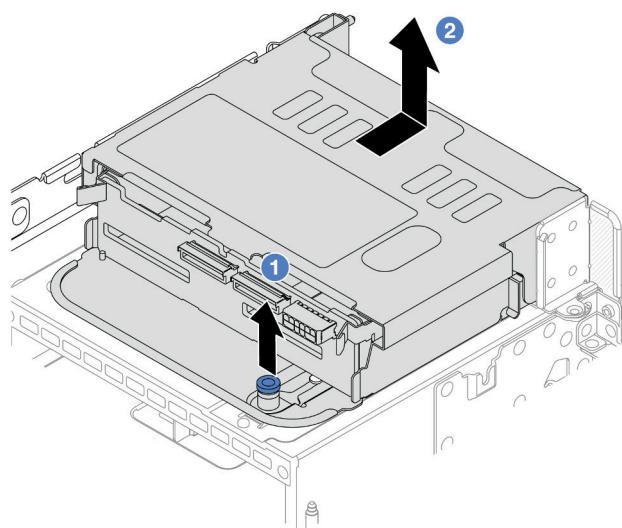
Removing the 4 x 2.5-inch rear drive cage
